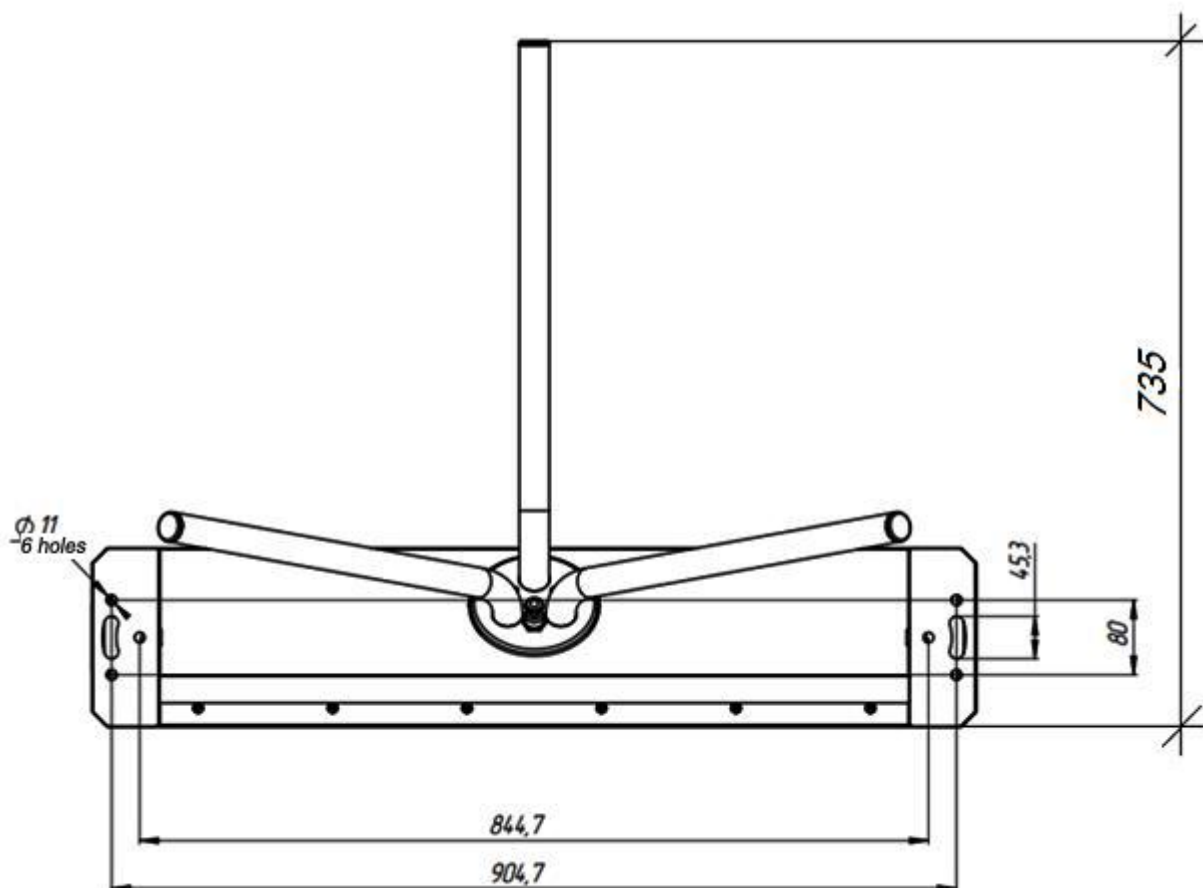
Position of mounting holes relative to the external dimensions of the turnstile
